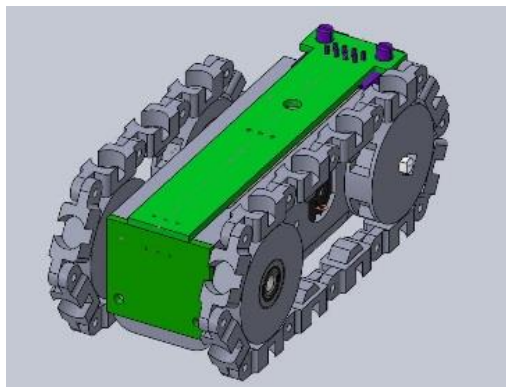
The CAD drawing of the scaled-down version of the inspection tool.
